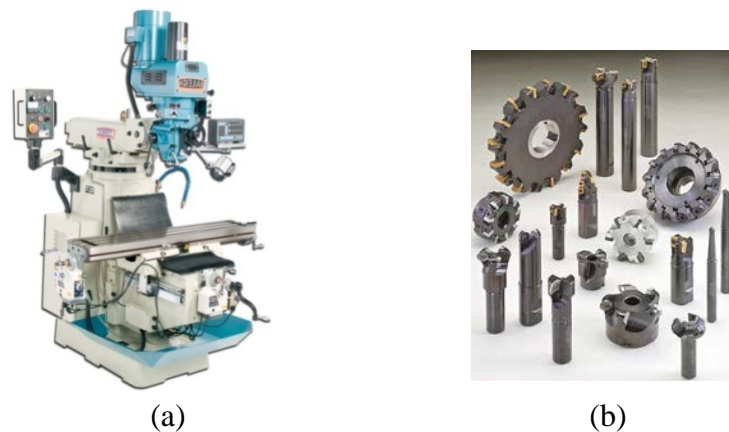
Milling machine (a) and the common tools used in milling (b)
